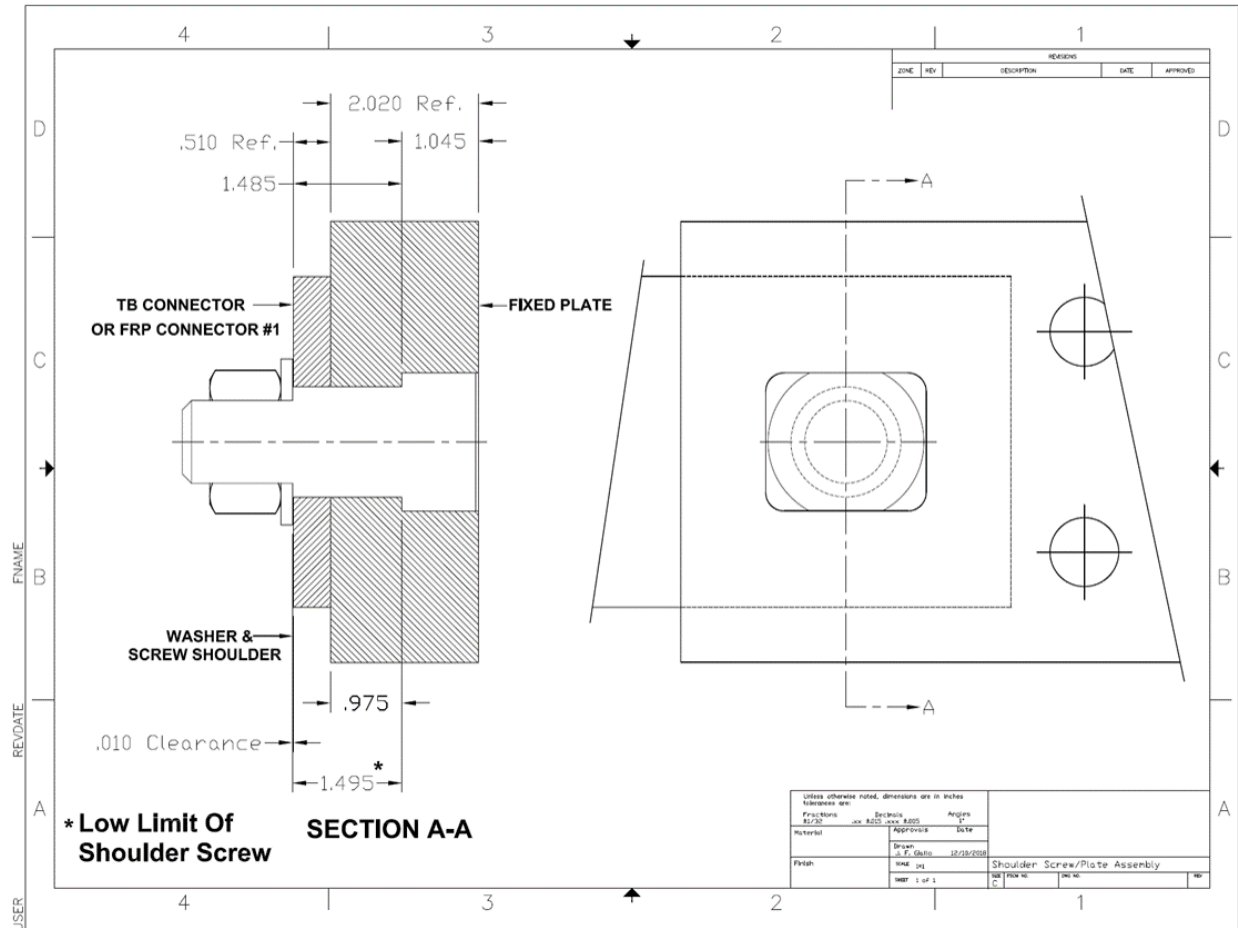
Fixed anchor plate-pin as-built assembly detail.
